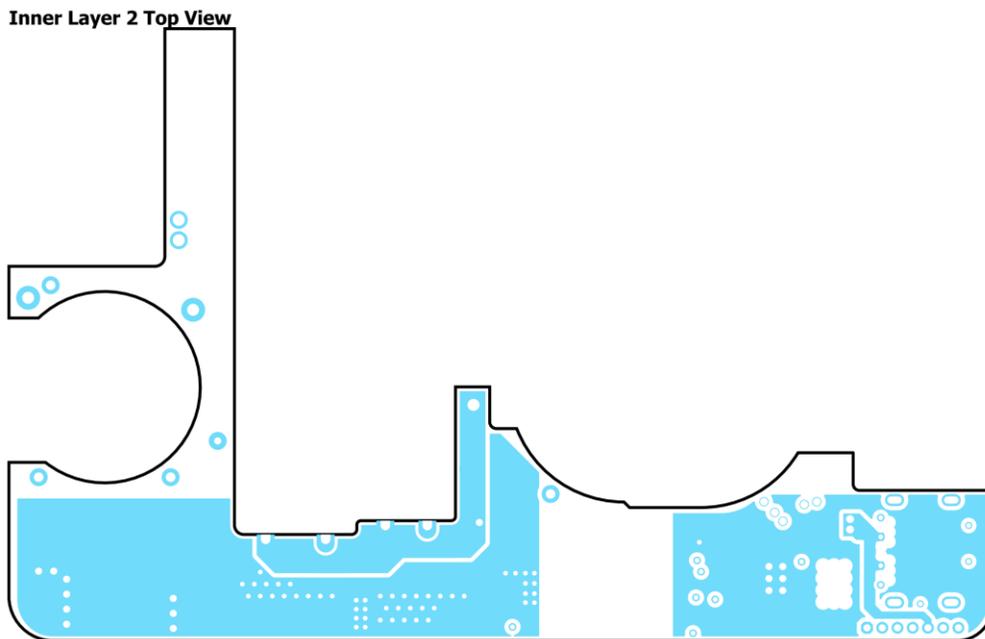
Motherboard Printed Circuit Layout, Inner 2.
